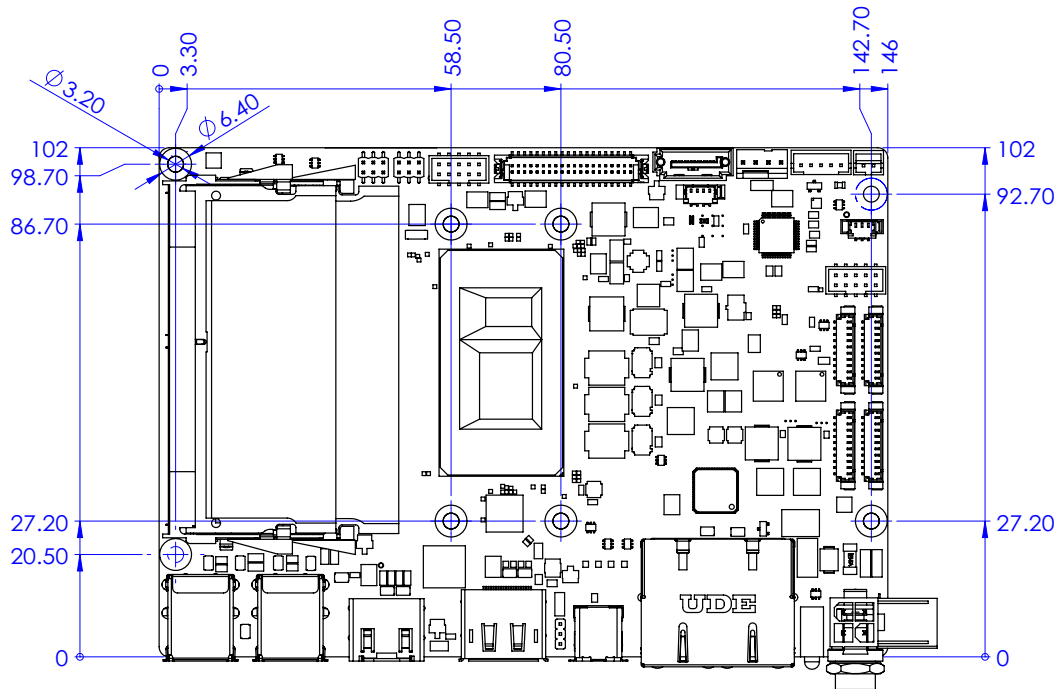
MIO-5375 Mechanical Drawing (Top Side)
